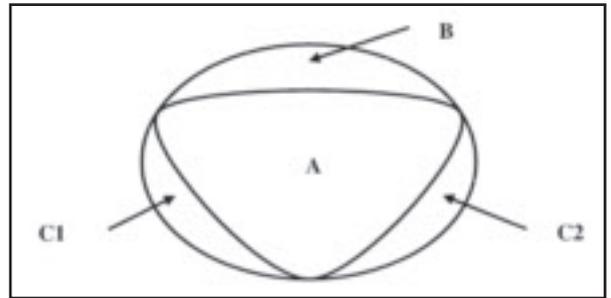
A schematic of short-transverse section of weld nugget indicating various regions of weld bead denoted by alphanumeric. This pictorial view is used for calculating percentage dilution using a mathematical equation.
